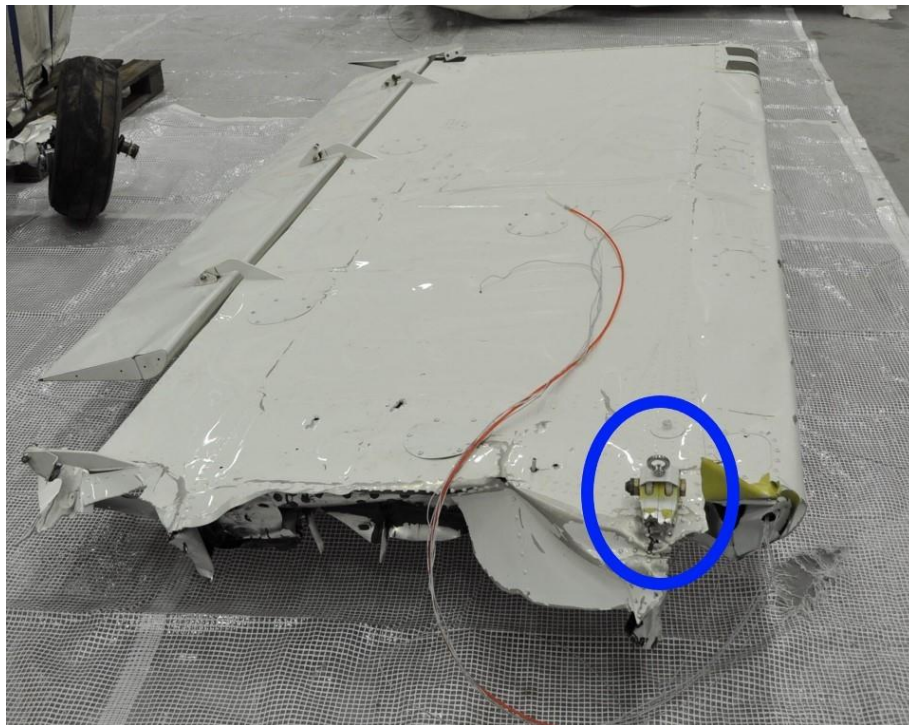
Lower surface of the broken outer section of the right wing. The broken attachment to the wing strut is marked.
